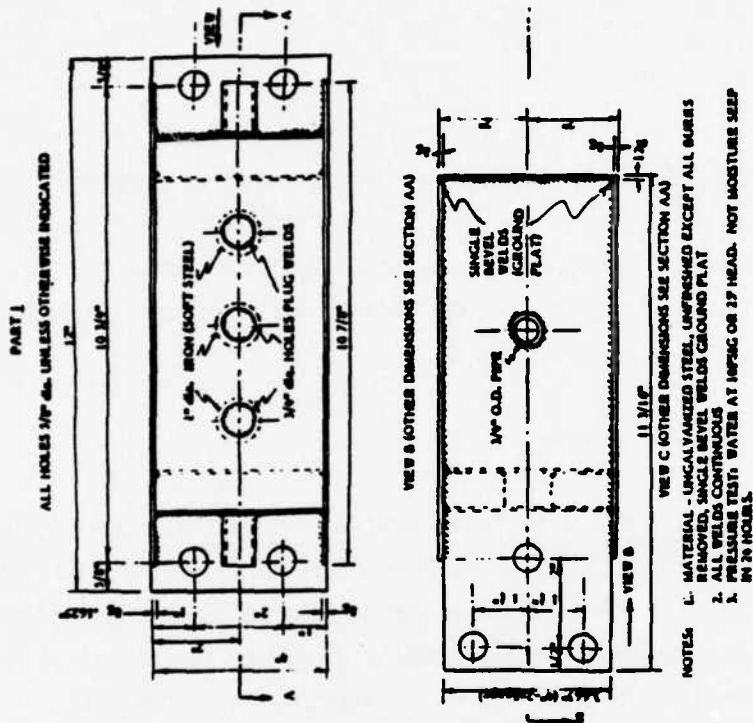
Vaned Shutter Housing Fabrication Drawings.
